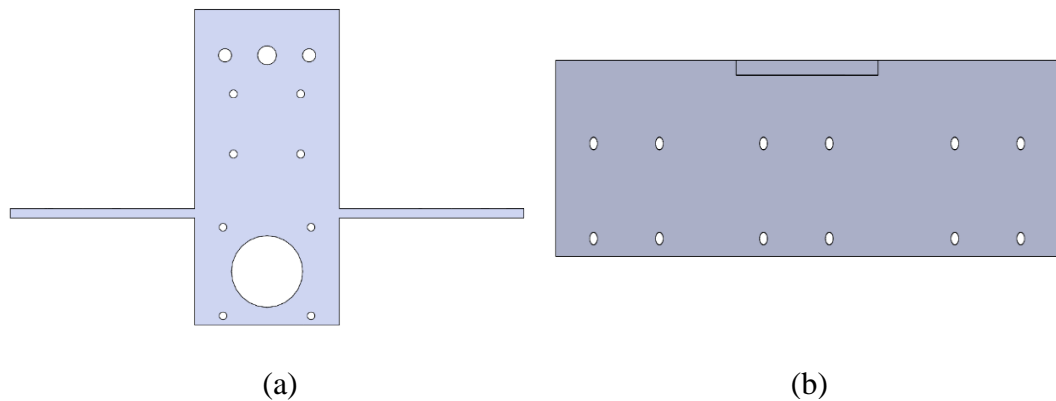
X-axis Motor Holder, (a) Top View and (b) Front View
